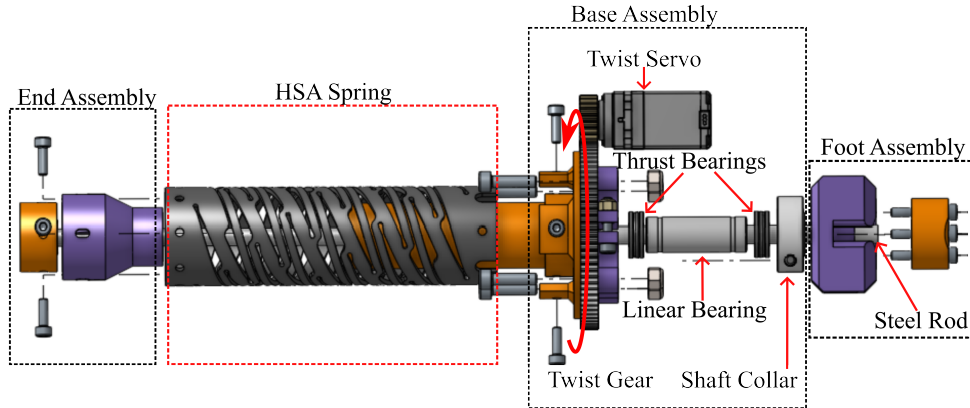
Exploded view of the HSA assembly, illustrating the twisting mechanism at its base. The HSA is fixed at its right end to a gear carrier, which is driven by a compact servomotor (“Twist Motor”). The left end is coupled to the foot via a 30 cm steel rod passing through a linear bearing embedded in the base. A shaft collar and thrust bearings secure the gear assembly to the cart (not shown). Inside the HSA, a rigid cylindrical insert (occluded in orange) enables the braking mechanism by limiting auxetic deformation.
